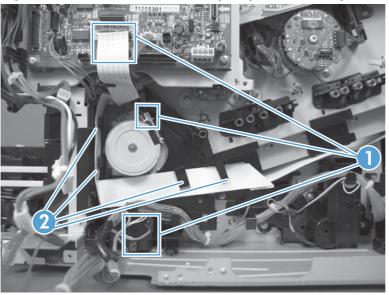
Remove the cassette pickup drive assembly (5 of 10)
